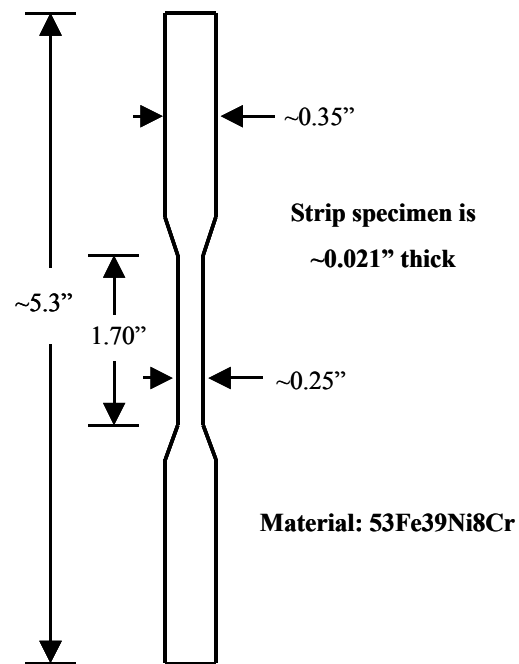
Dimensions of dog-bone sample used for uniaxial tension tests.
